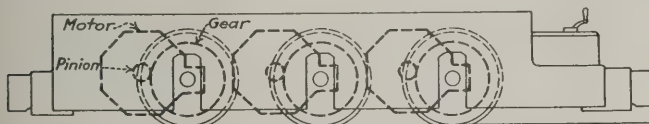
Arrangement of Motors on a Three Motor Locomotive
